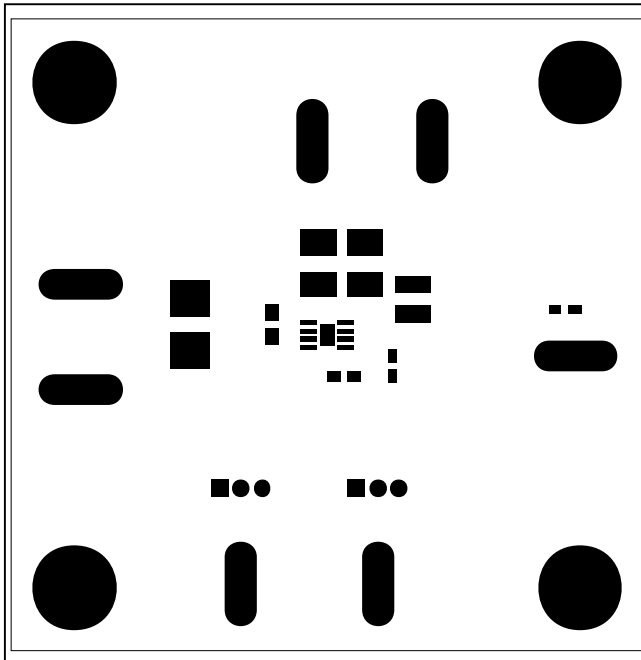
MAX17620 EV Kit Solder Mask—Component Side
